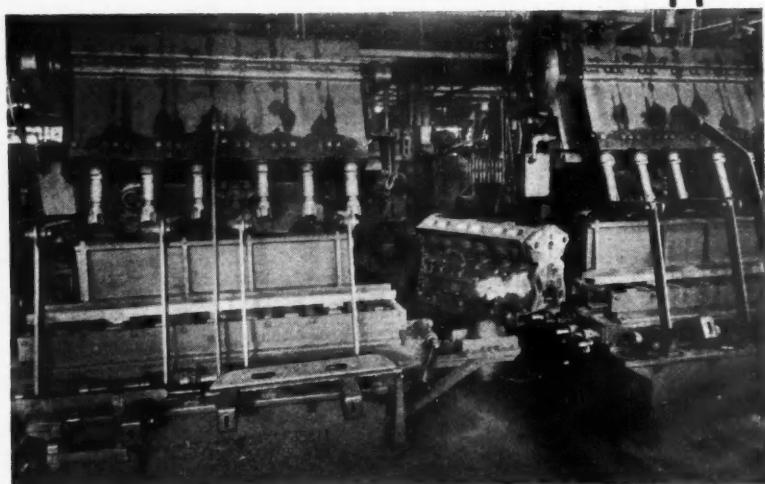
One of the first production boring machines with variable centers, adjusted by spacers, and designed for cemented-carbide tools. This is a six-spindle inclined Moline Hole Hog
